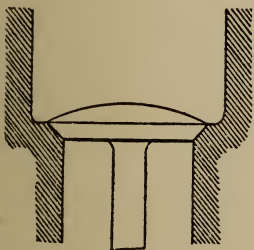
The valve is in the closed position. The mitre-faces fit firmly together, and form a gas-tight joint.
